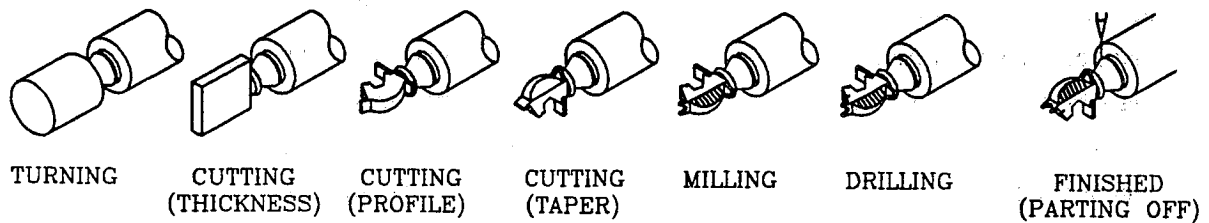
Example Sequence for Complex Three-Dimensional Machining with an AWJ
